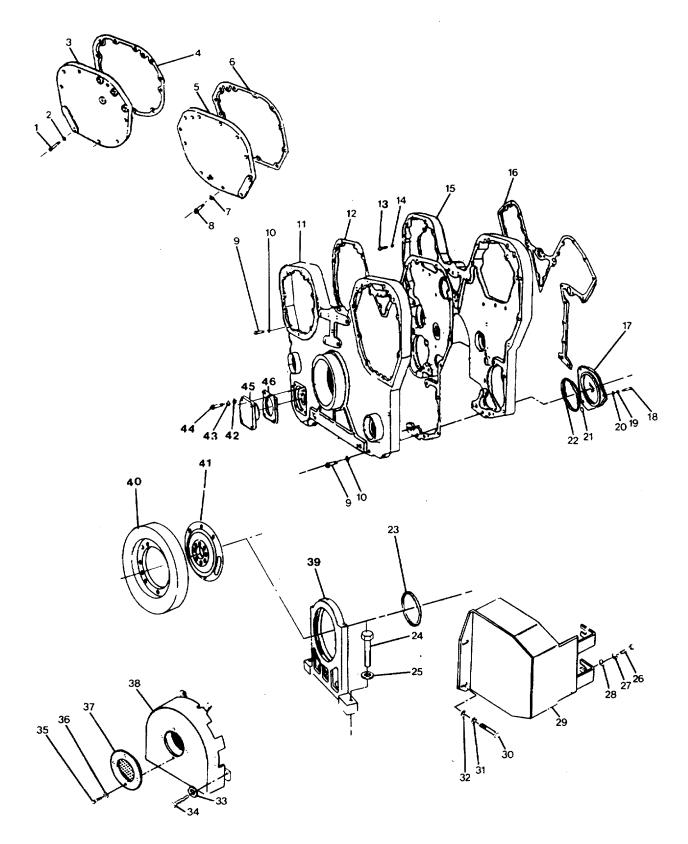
Pulley Shields and Front Gear Housing Group.
